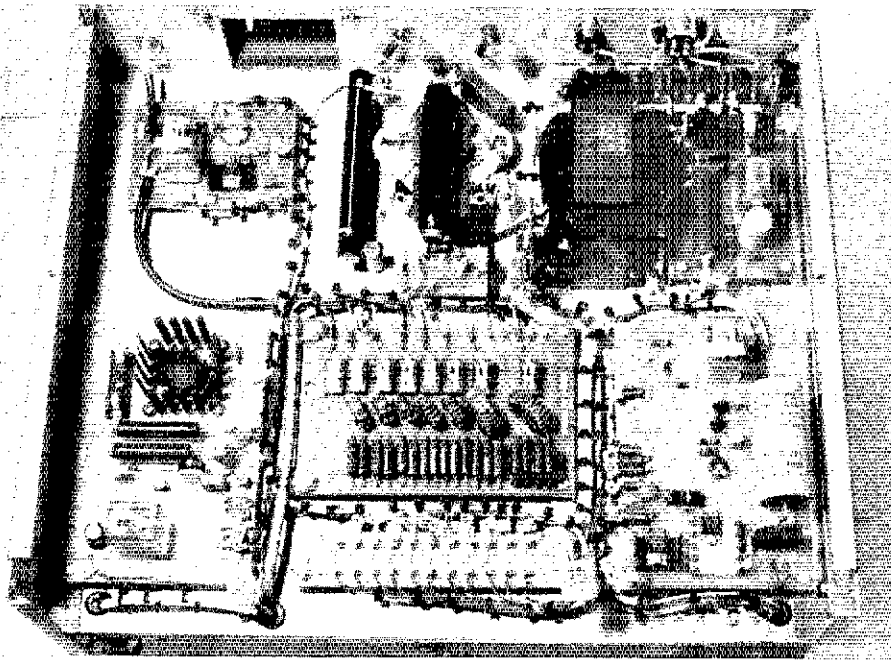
Bottom view of the RF deck showing harness wiring in place.
